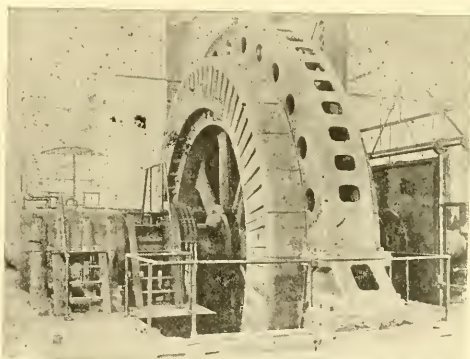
7000 HP INDUCTION MOTOR DRIVING THE MILL SHOWN IN FIG. 4
